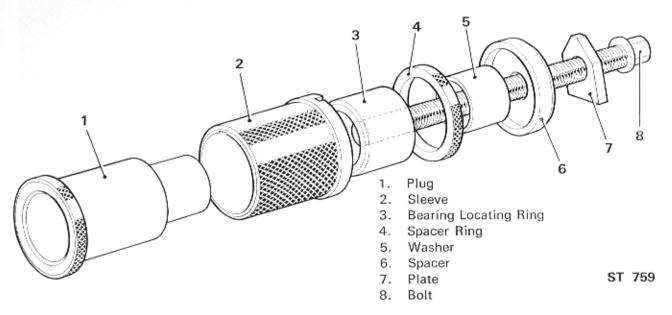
Components of Main Bearing and Camshaft Bush Tool
